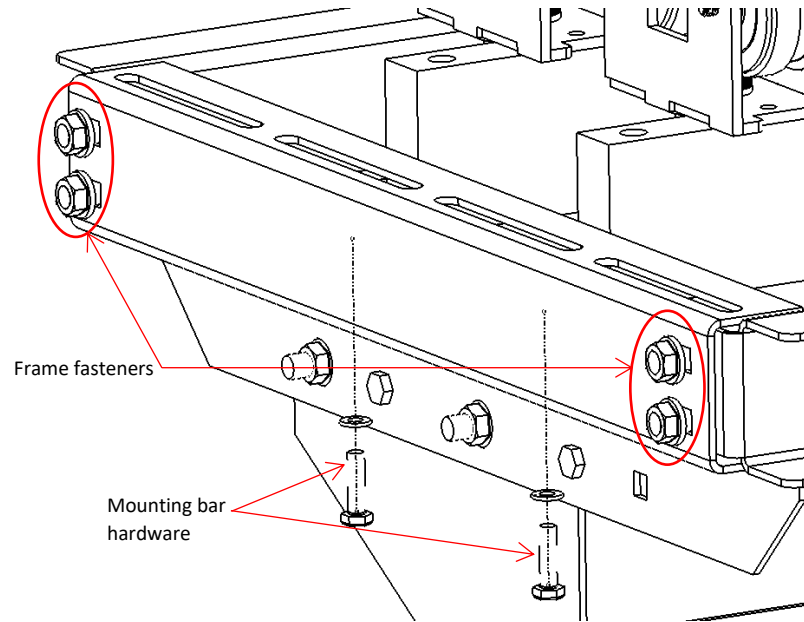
Mounting bar screws and serrated flange nuts on left side of PWD frame
